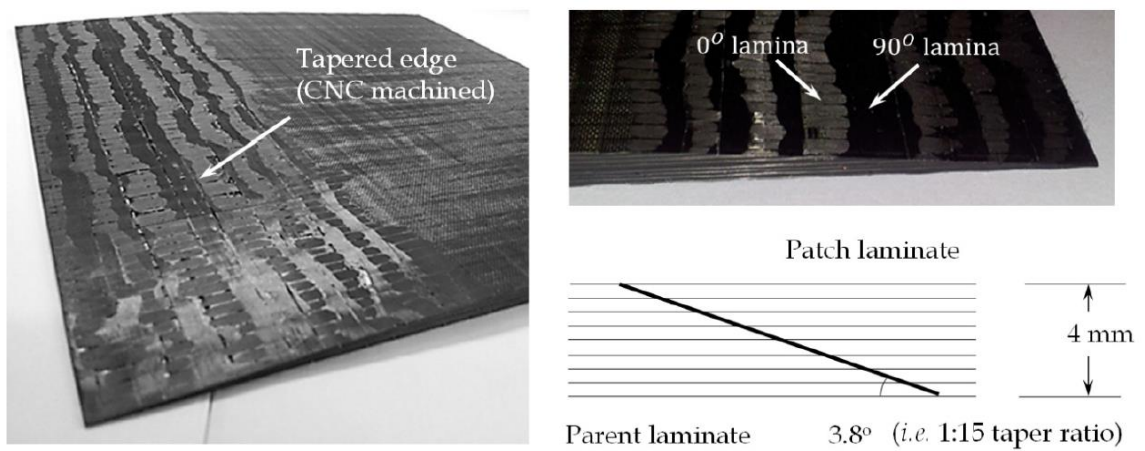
Photograph and schematic of CNC machined scarf used in [115].
